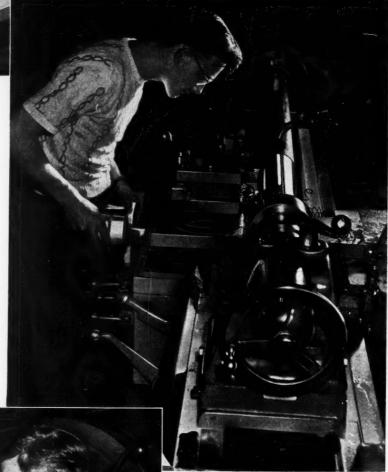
Rifle tubes are roughand finish-bored on a horizontal gun boring machine. Babbitt metal "packs" guide the cutting tools through the long bore
